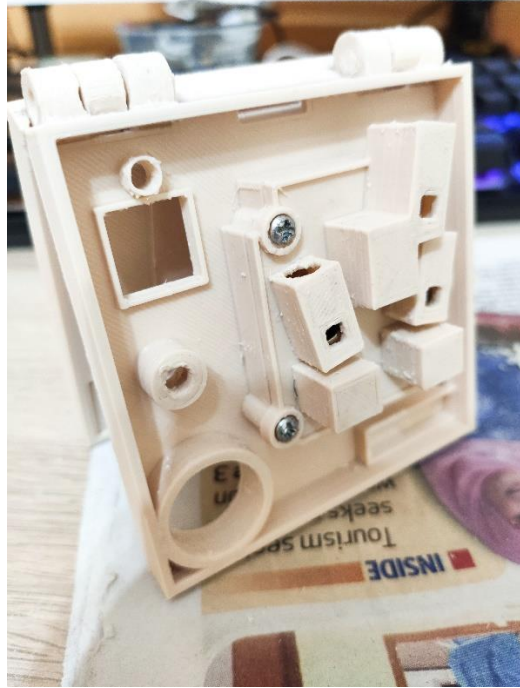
Rear View of The Smart Wall Outlet Structure
